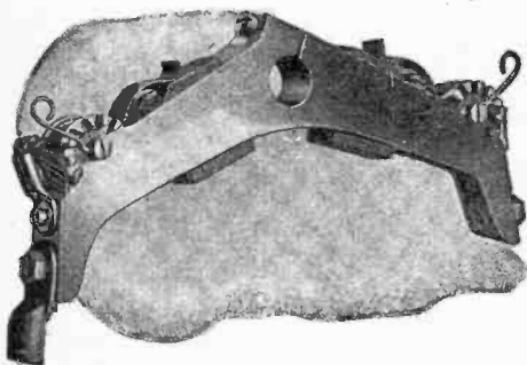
,806.—Brush holder of Allis Chalmers type ARY external resistance or slip ring motor. It is of the double holder type cast in one piece of bronze metal. One holder (with two brushes) per ring is used on small ratings and two holders (four brushes) on larger ratings. The boxes are radial to the slip rings, and adjustment of the angle of contact as the brush wears, is unnecessary. The pressure arms are of heavy, copper plated, clock spring steel, mounted face to face, which equalizes the stresses set up in the brush holder stud. Adjustment of tension is made by means of the tension ad-
